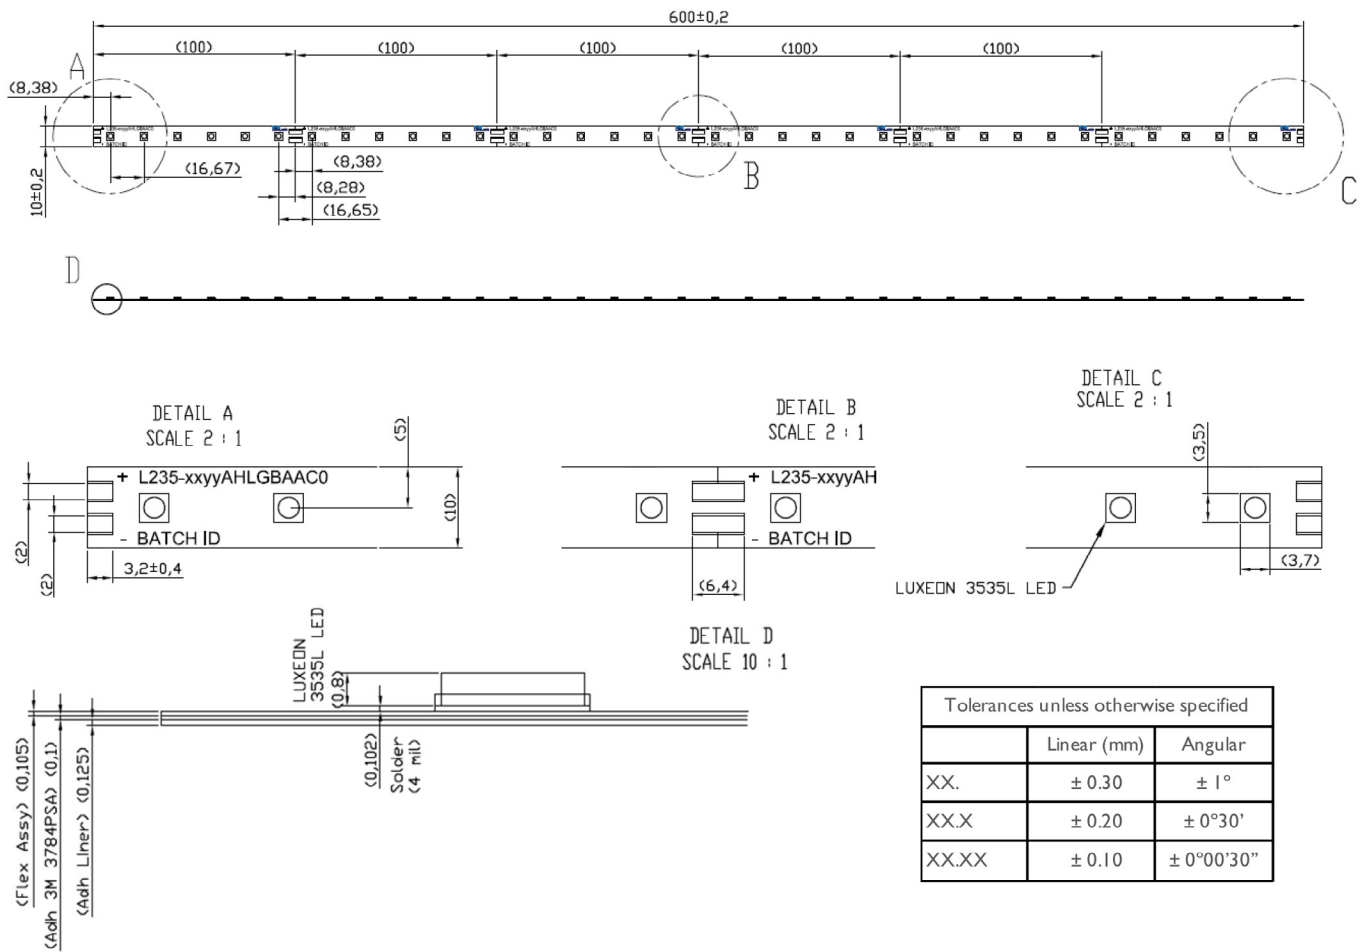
Mechanical drawing for L235-xyyyAHLGBAAC0.
